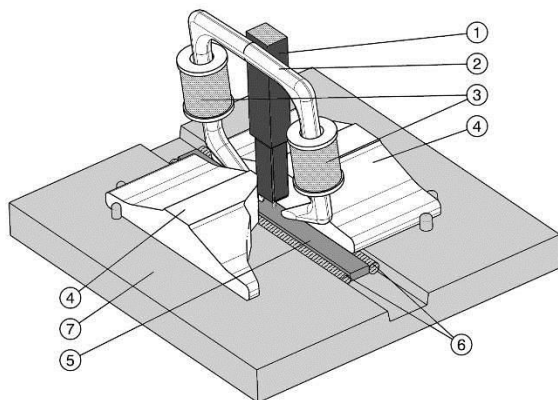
Schematic depiction of experimental setup. 1... welding torch 2... magnetic yoke 3... coils 4 ... rail foot samples 5... steel strip for weld pool support 6... ceramic tube lateral backing 7... clamping and support plate.
